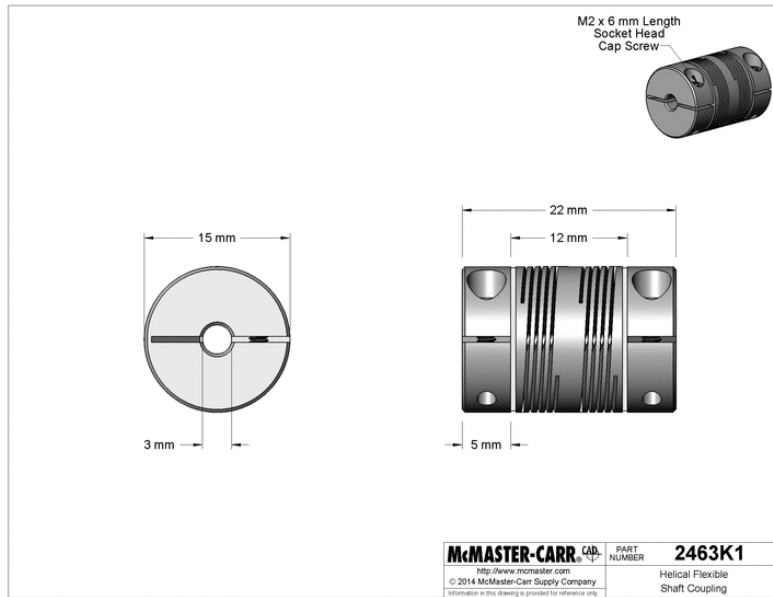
McMaster SolidWorks CAD drawing of shaft coupler between the motor shaft and the Wiper connection [137].
